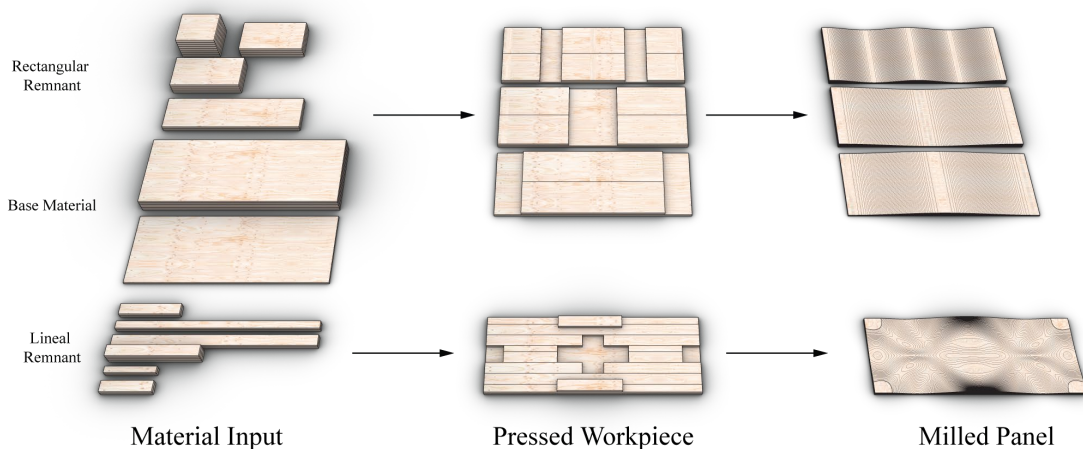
Geometries to fabricate from lineal and rectangular additive material
